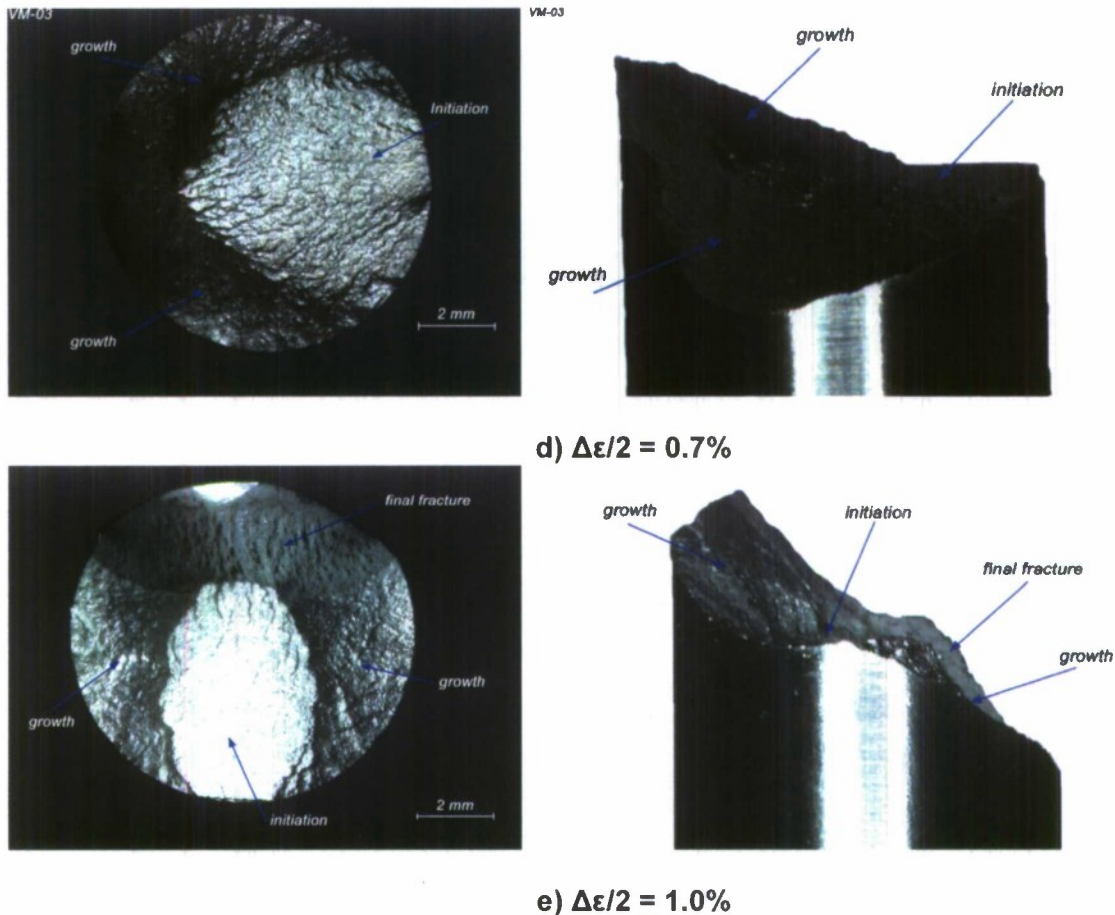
Photographs of fatigue cracks in tension-compression specimens: 4340VM steel
